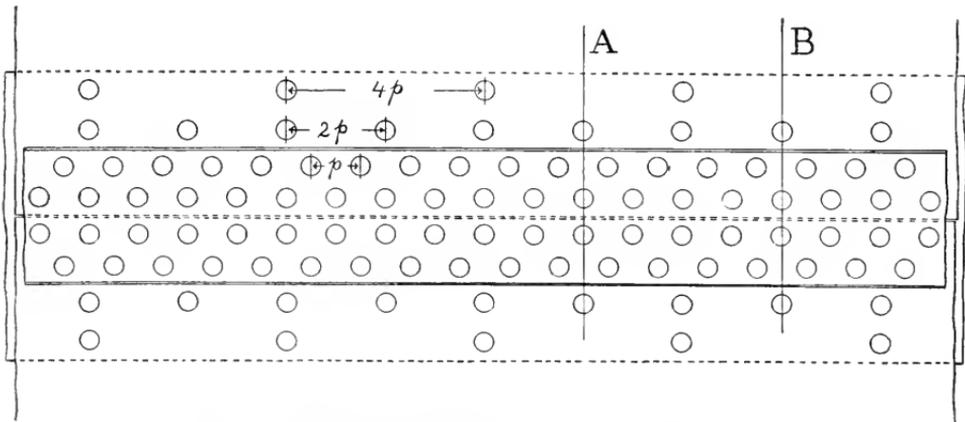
QUADRUPLE-RIVETED BUTT STRAP JOINT.
